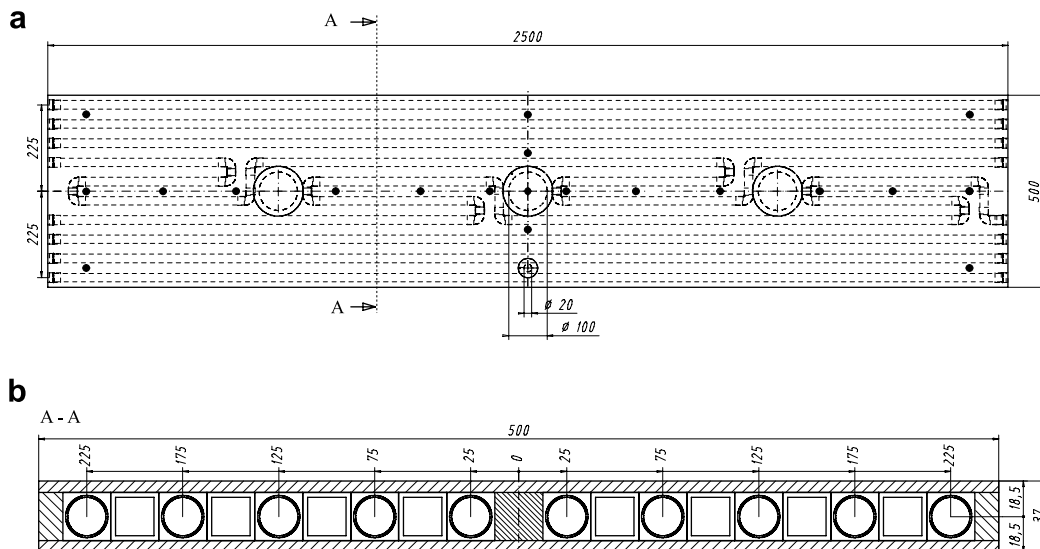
Construction of the plates (a) and their cross sectional view (b).
